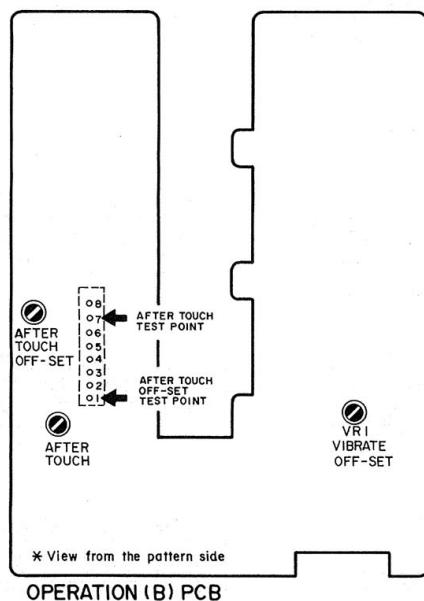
Adjustment points of the OPERATION (B) PCB.
